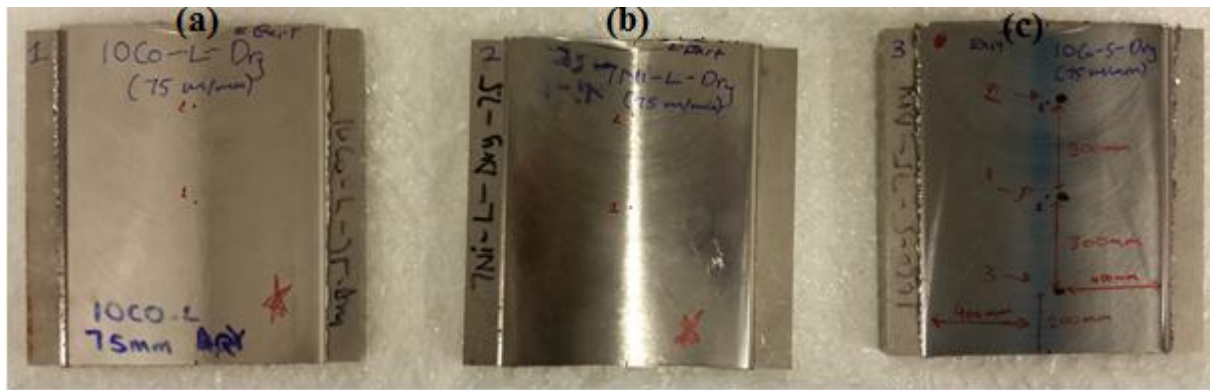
Ti-6Al-4V samples used for preliminary residual stress measurements: (a) samples machined with 10Co-L insert, (b) sample machined with 7Ni-L insert, (c) samples machined with 10Co-L insert at a v_c of 75m/minute and a_p of 0.5mm
